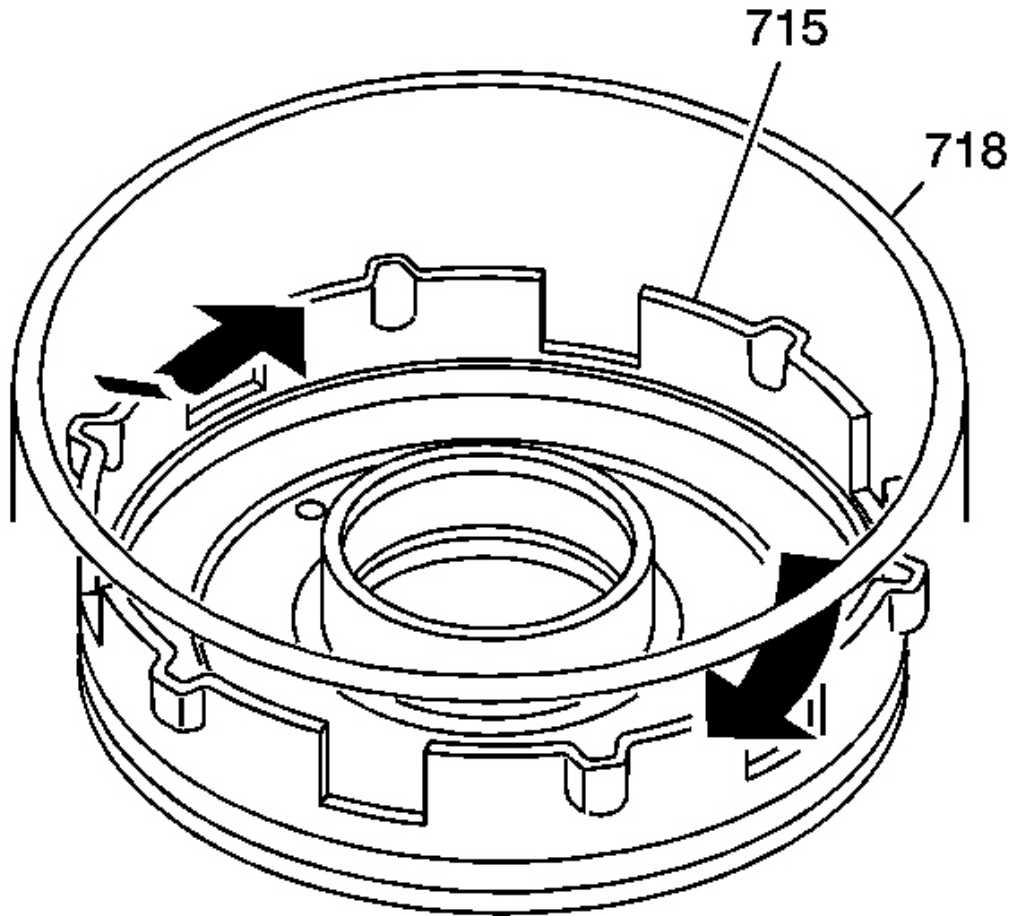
Installing The 1st Clutch Piston Into The 1st & Coast Clutch Housing
